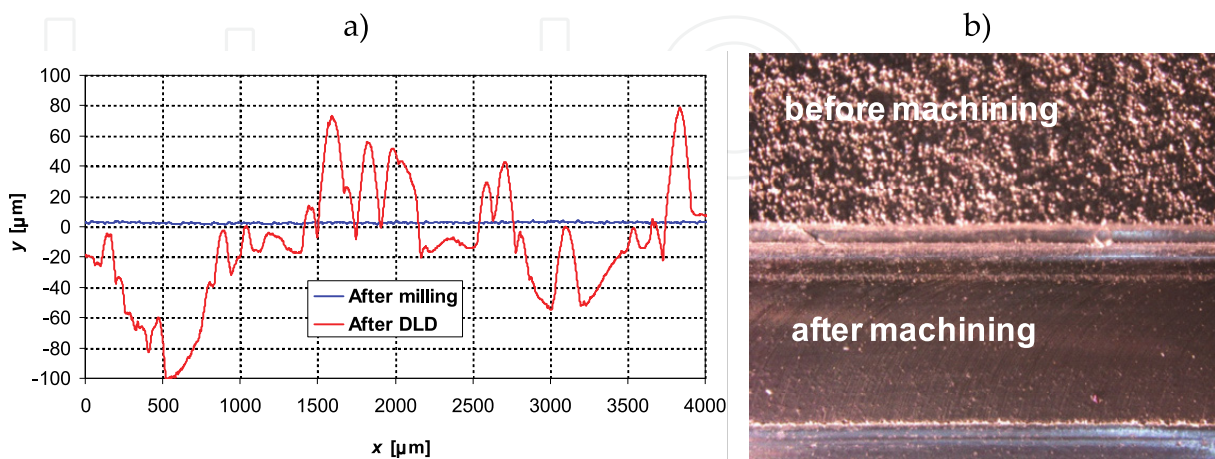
Surface texture of tungsten carbide manufactured by DLD technology, before and after machining: a) 2D surface profile, b) image of surface
